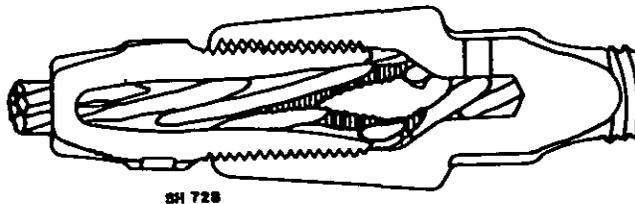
Wire rope core and wire strand core wedge, cutaway view showing how wire is locked in place.
